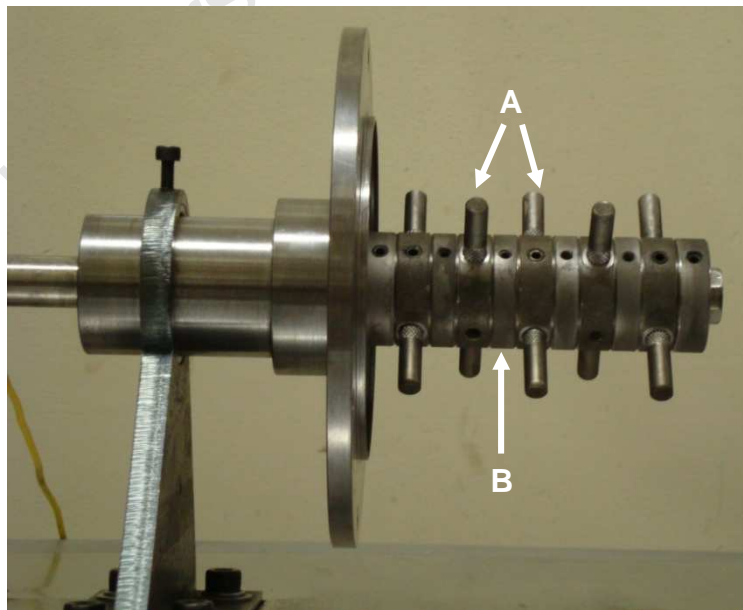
Shows cantilevered stirrer assembly. A – pin-collar subassemblies set at 90° to each other and B – spacer collar.
